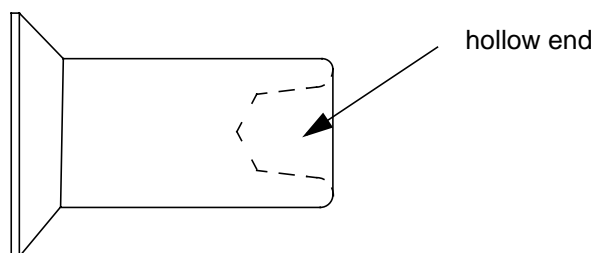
B0205023 “E-Z Buck” Rivet Cross Section
